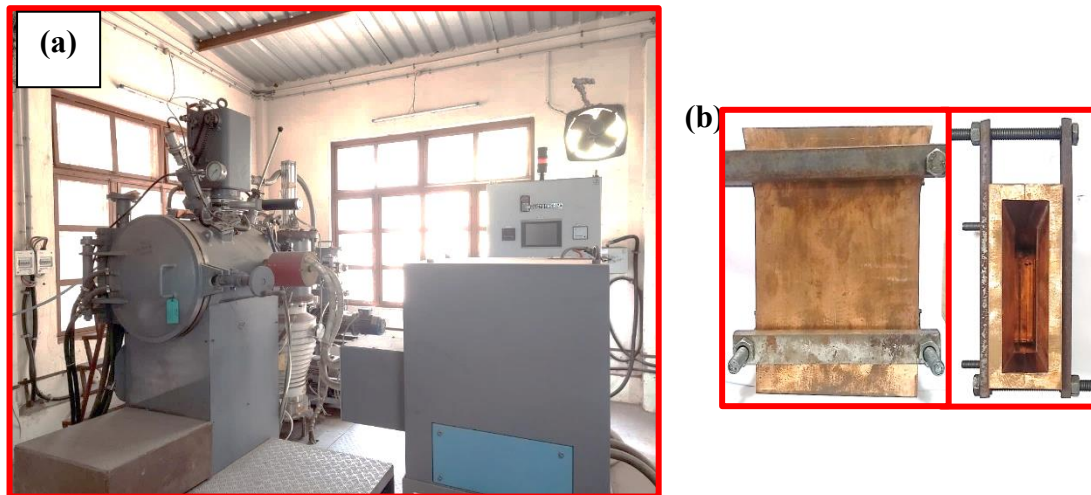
(a) Vacuum induction melting furnace and (b) copper mold.
